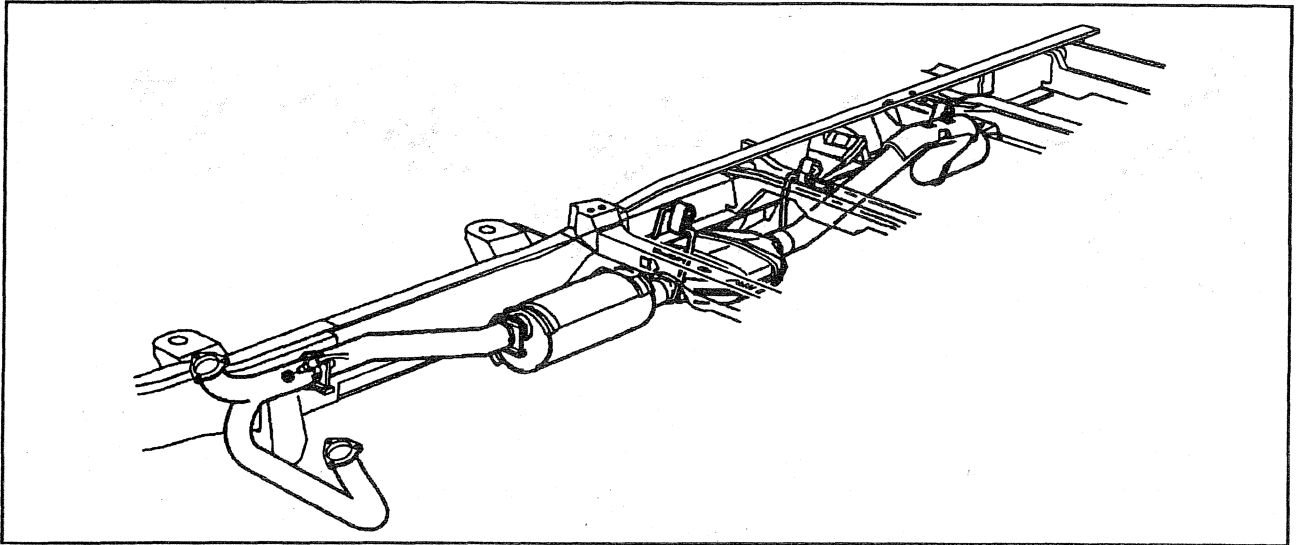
Exhaust System - C 3 Cab Chassis (Model 310 w/L19 & 15,000 GVW)
